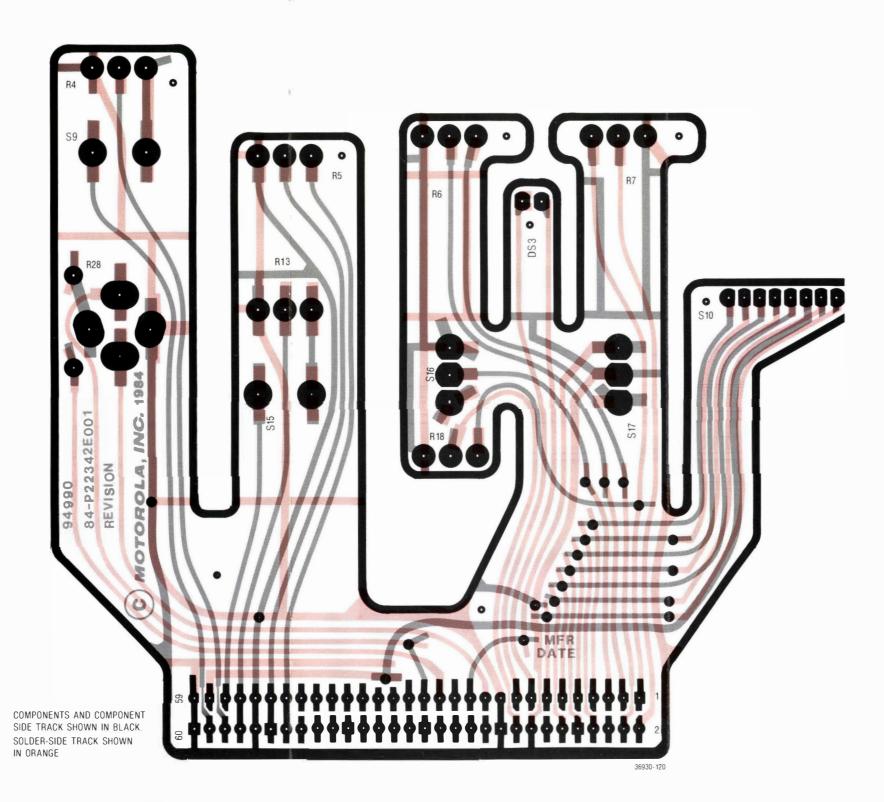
Front Panel Left Flex (Display) (See Sheet 4, p. 18-9, for Parts List)
